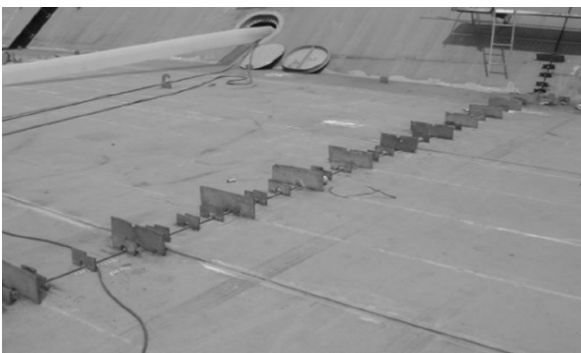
Set up pieces by welding at block assembly stage.
